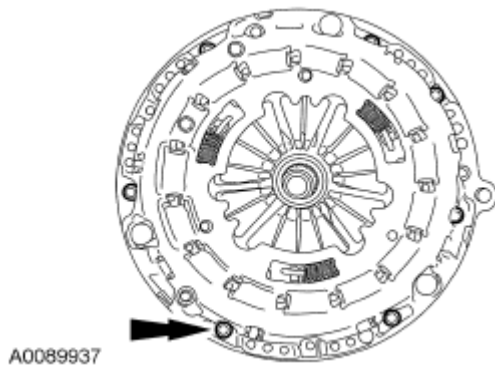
Locating Bolts, Clutch Pressure Plate & Clutch Disc
